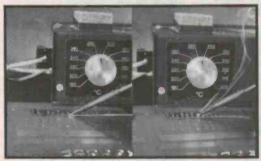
Too little heat. The solder forms a large contact angle with the surface and can be prised loose.
